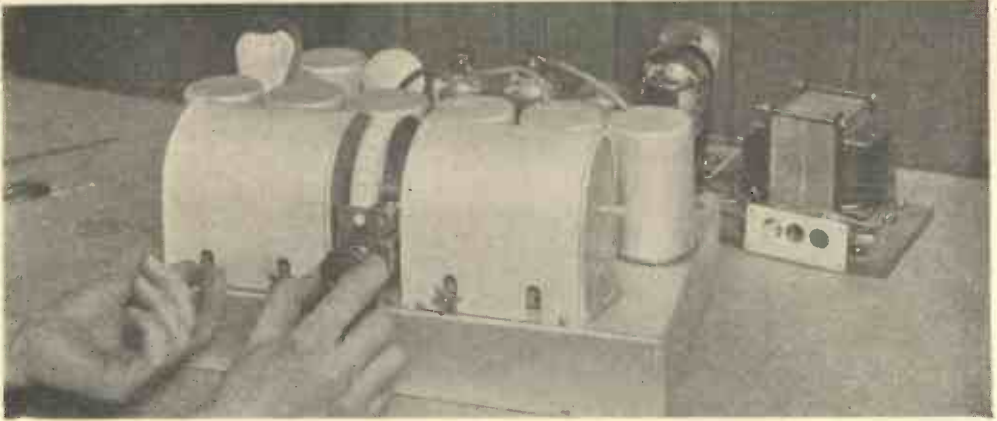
THIS SHOWS HOW ACCESS CAN EASILY BE OBTAINED WHEN ADJUSTING THE TUNING CONDENSERS.
